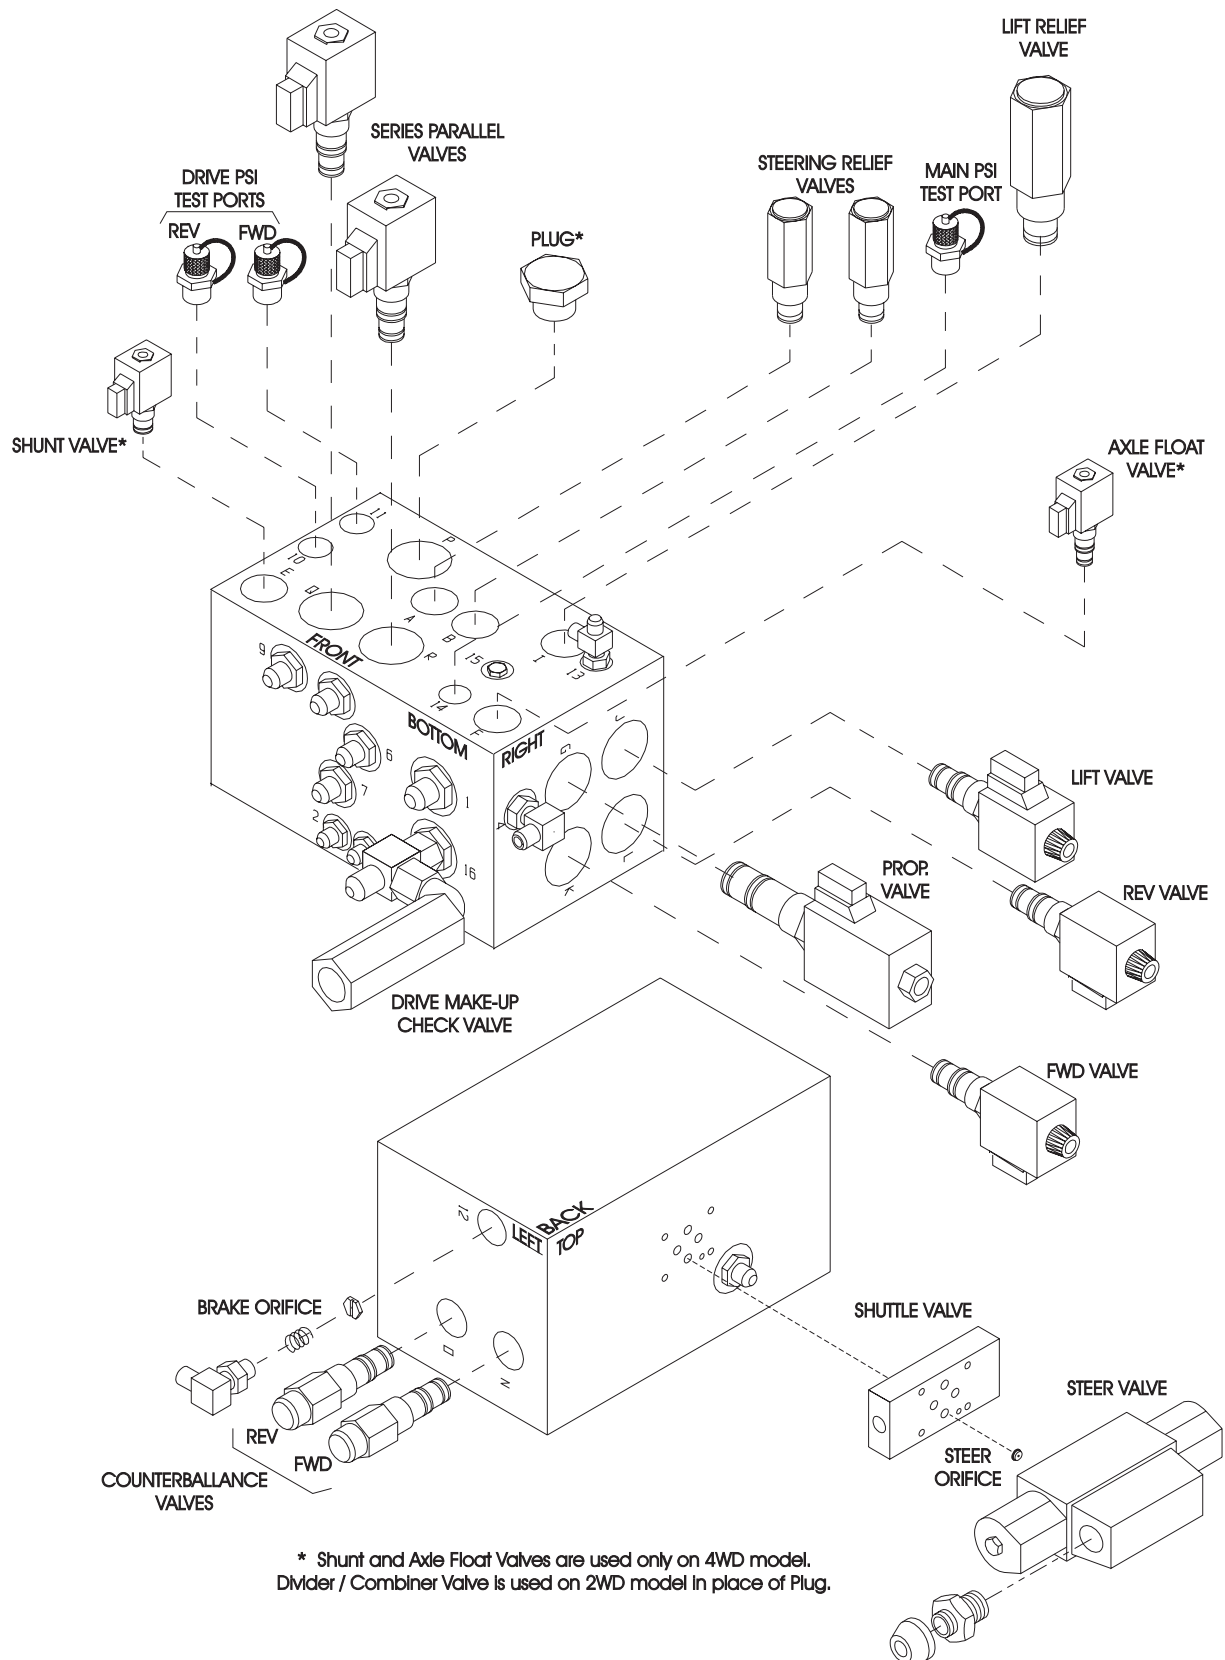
Hydraulic Manifold, Exploded View (4WD Shown)
